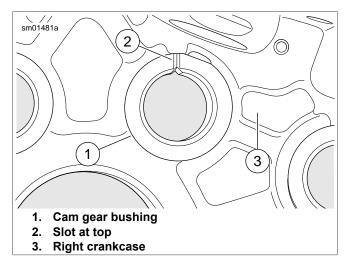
Cam Gear Bushing Installed in Crankcase
